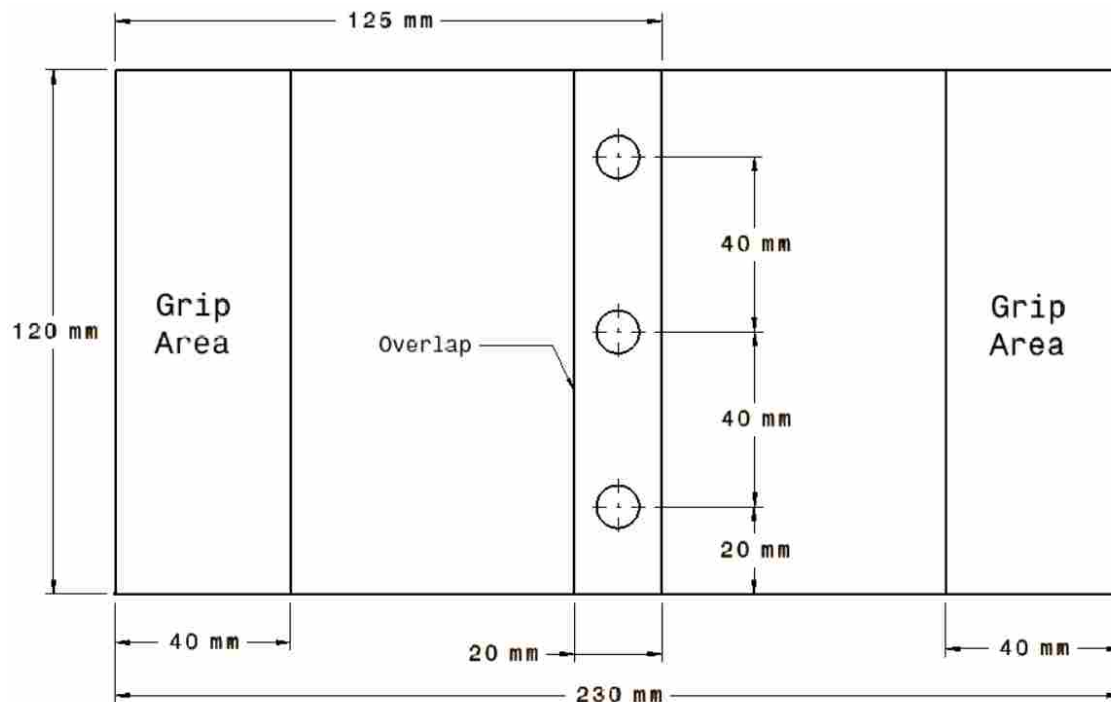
3 Weld, 40mm Spacing on 120mm Wide Lap-Shear Specimens
